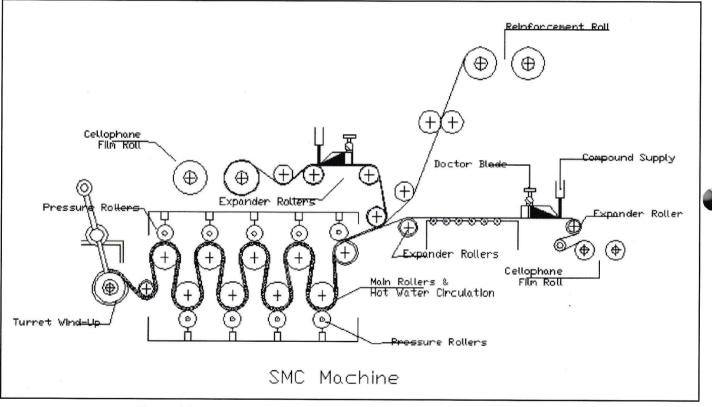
Schematic Diagram of SMC Machine for Composite Manufacture
